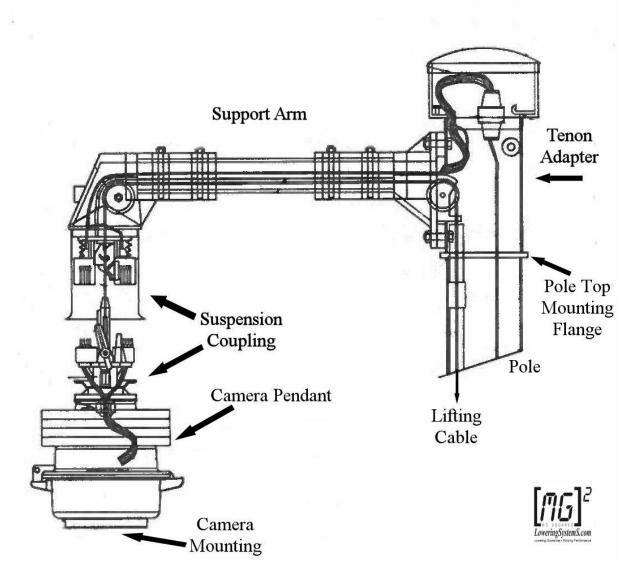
Detachable-type System Terminology (Internal Mounting Shown) (Image courtesy of MG²)
